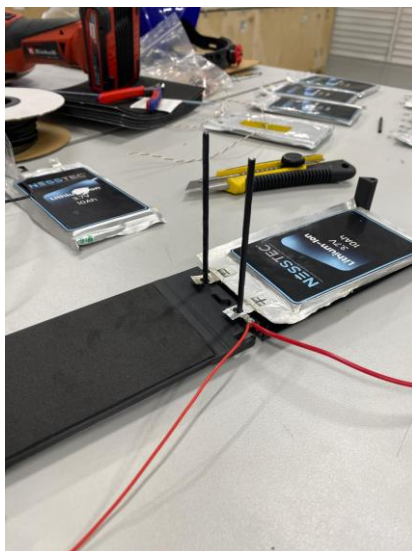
Threaded rod covered in heat-shrinking tube mounted on the lower cell
